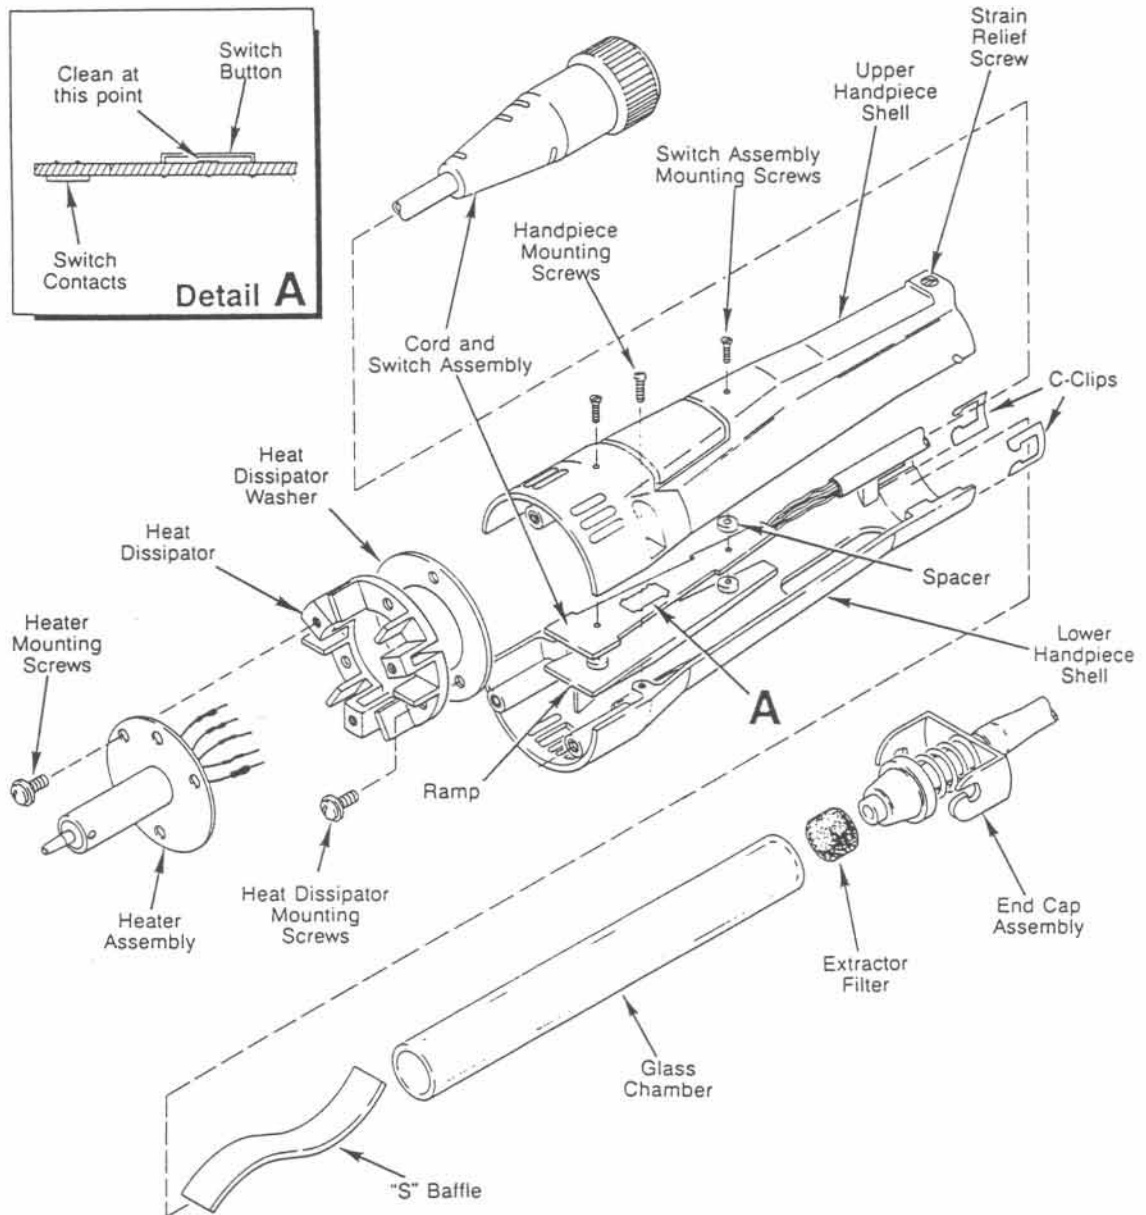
CLEANING AND REMOVAL/REPLACEMENT OF CORD AND SWITCH ASSEMBLY
